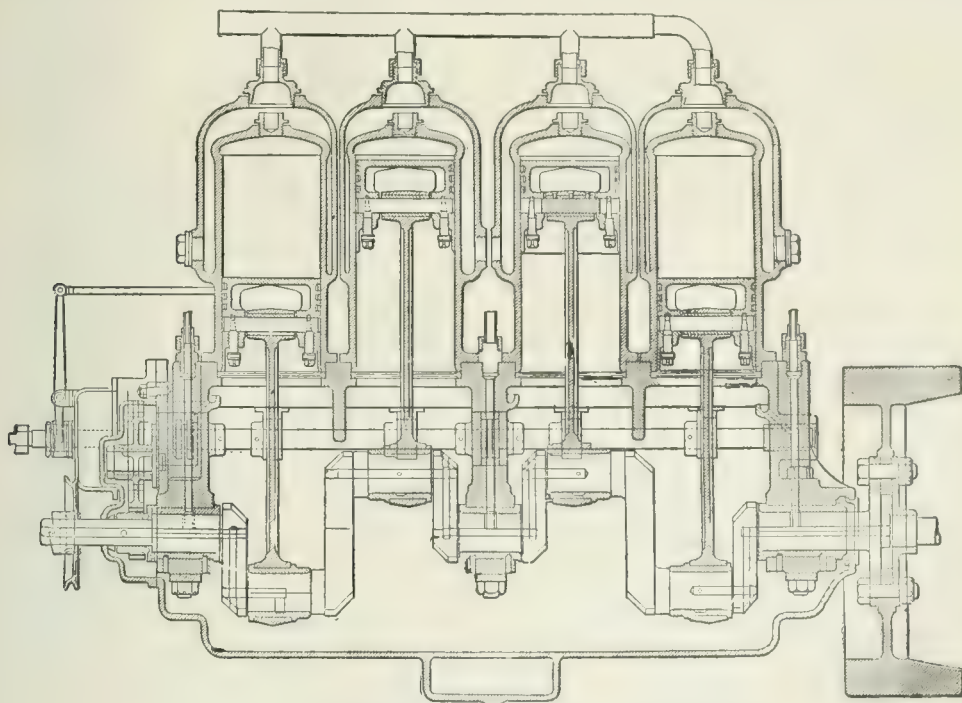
LONGITUDINAL SECTION THROUGH FOUR-CYLINDER MOTOR AND FLYWHEEL CLUTCH.
